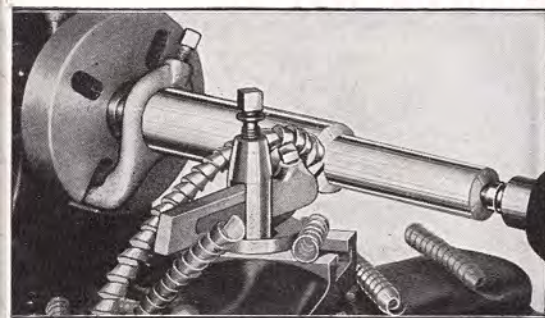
Reducing the Diameter of a Steel Shaft more than 1/4-inch in one cut on a 9-inch "Workshop" Lathe.
